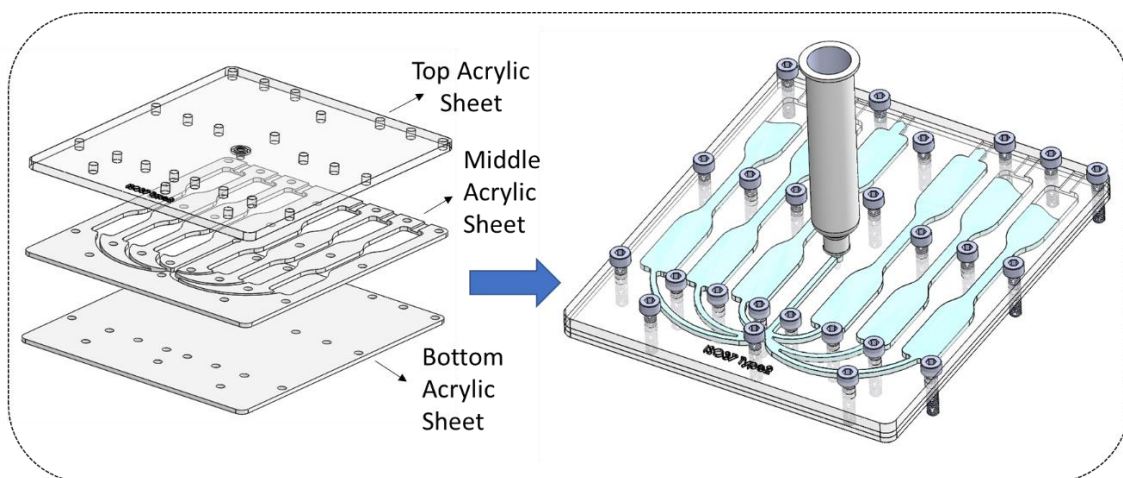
Mould assembly and fabrication process of tensile specimen.
